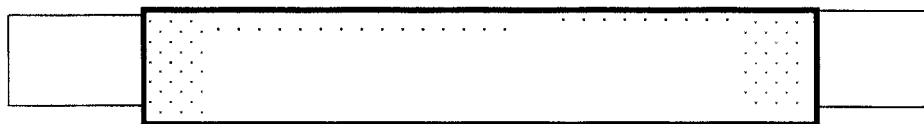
CABLE SPLICE-FINISHED ASSEMBLY
